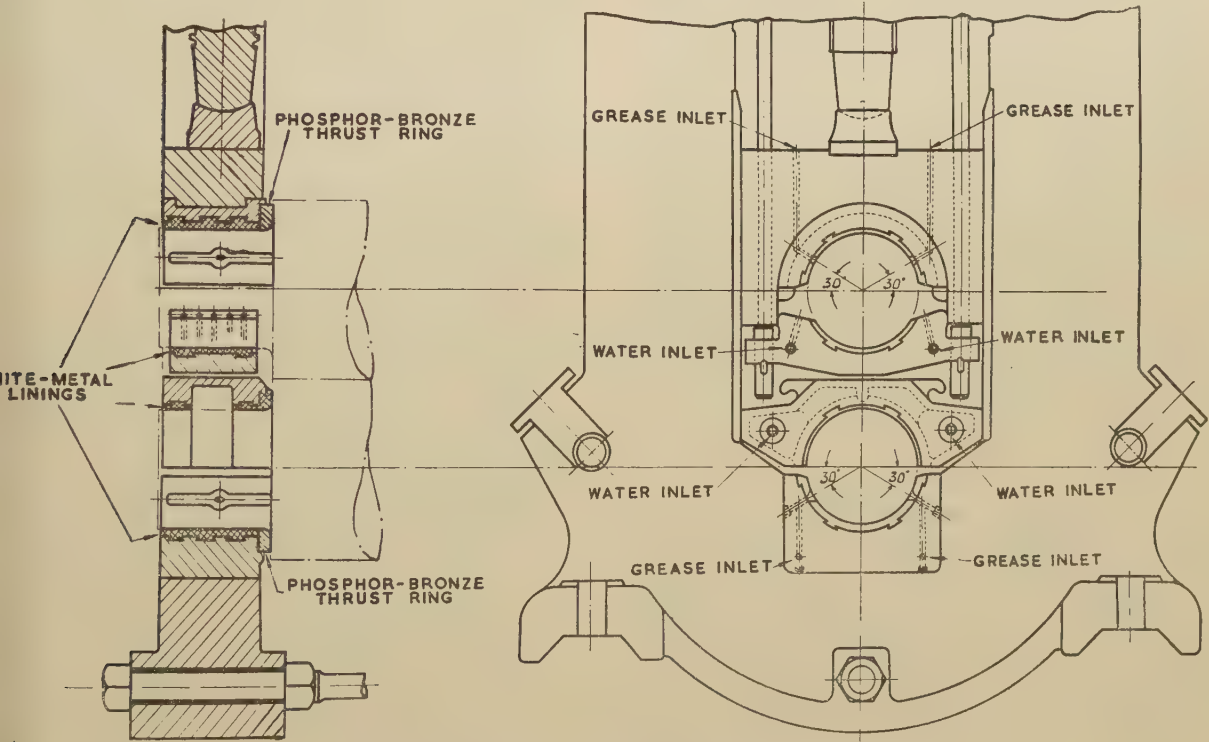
Arrangement of white-metal bearings for 18-in. bar mill
